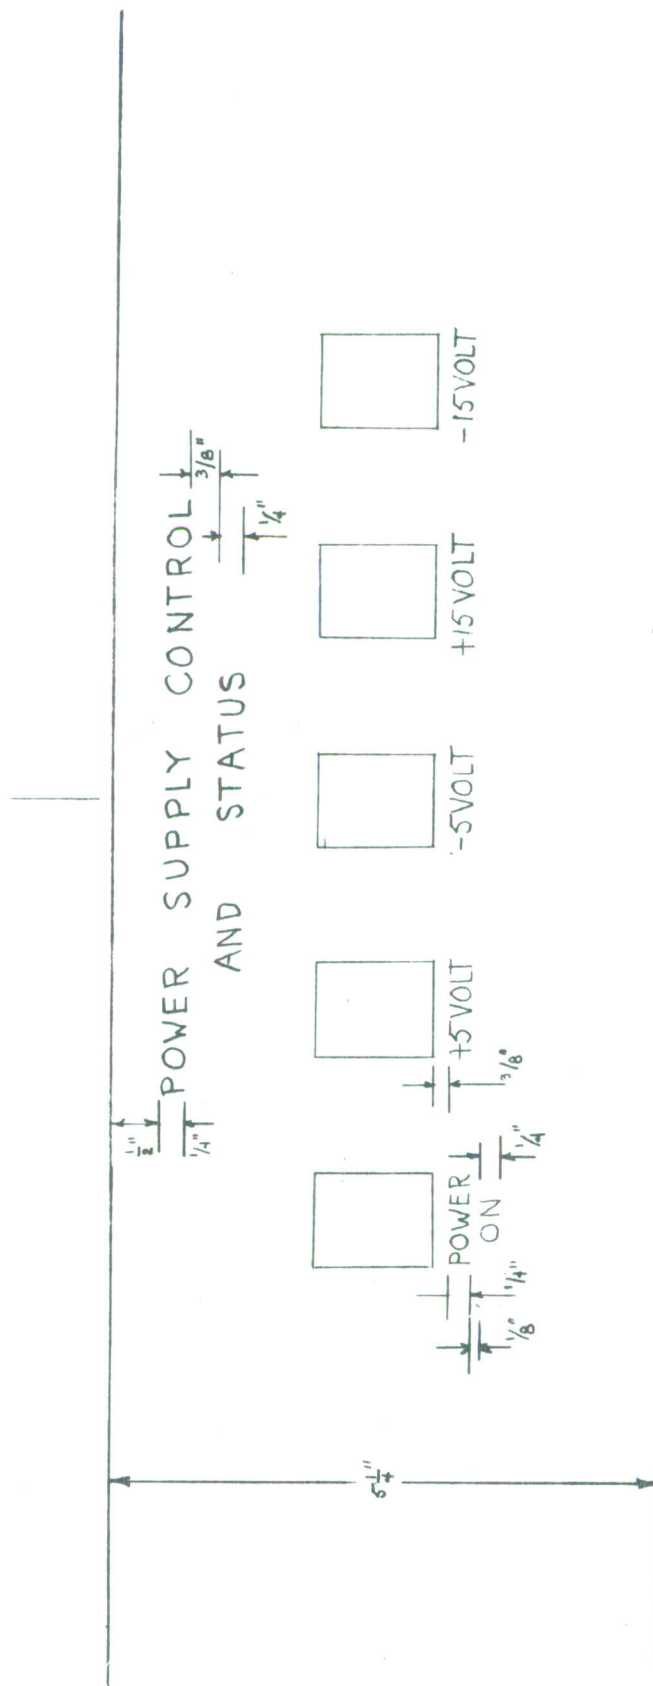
Power Supply Control & Status Front Panel Engraving Black Anodize After Machining White Fill on Engraving (Sheet 2 of 2).
